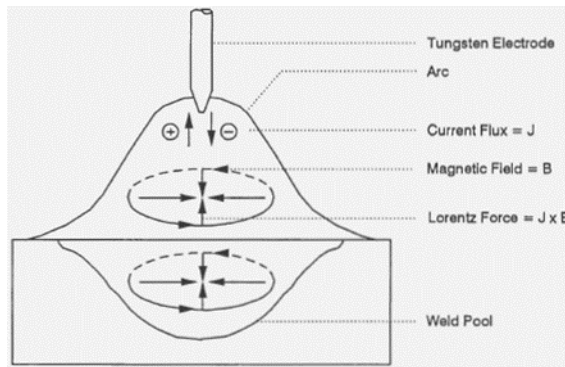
The electromagnetic force in the arc and weld pool [4].
